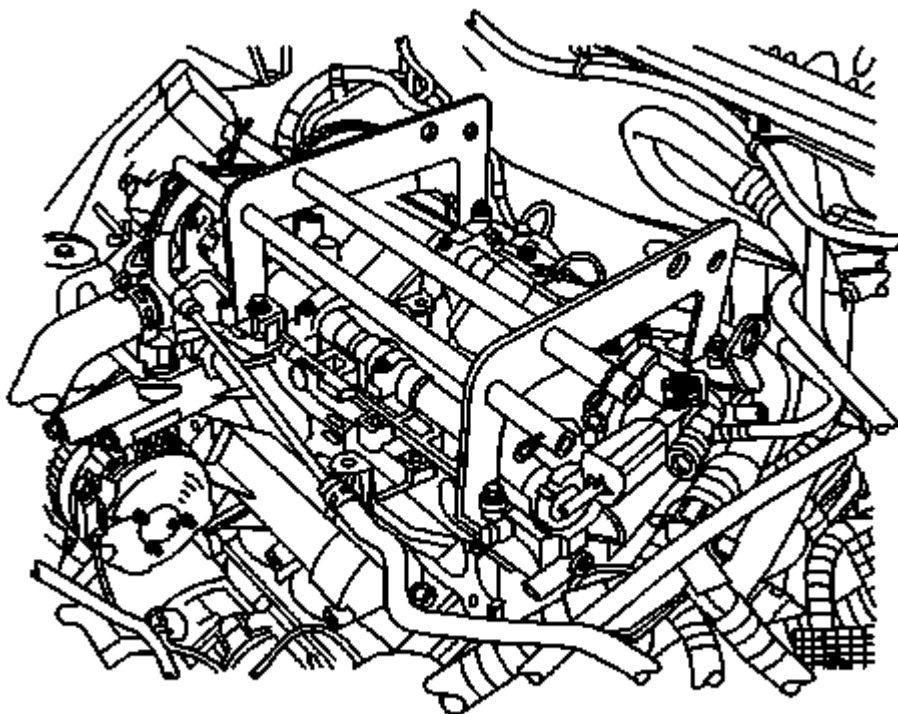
View Of J 43649 Valve Spring Compressor (Cylinder Head)
